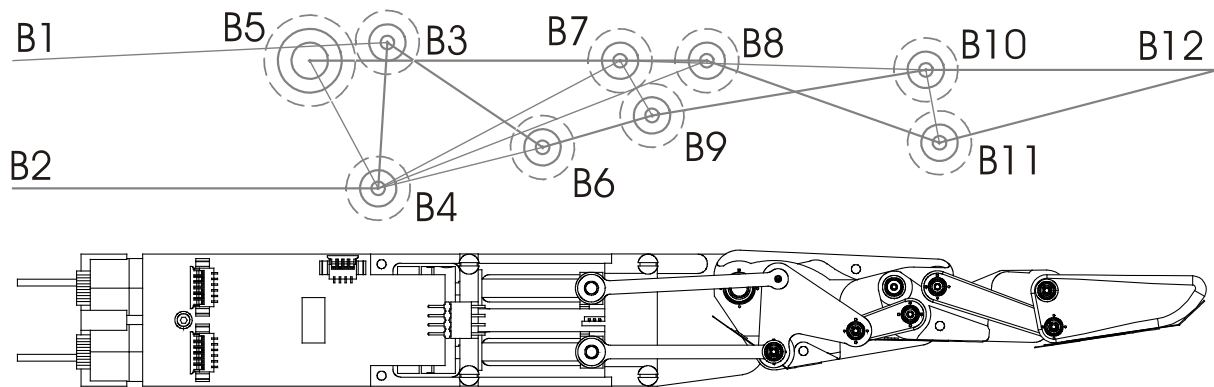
Little Maxon Motor Finger Linkage Geometry and Model Design
